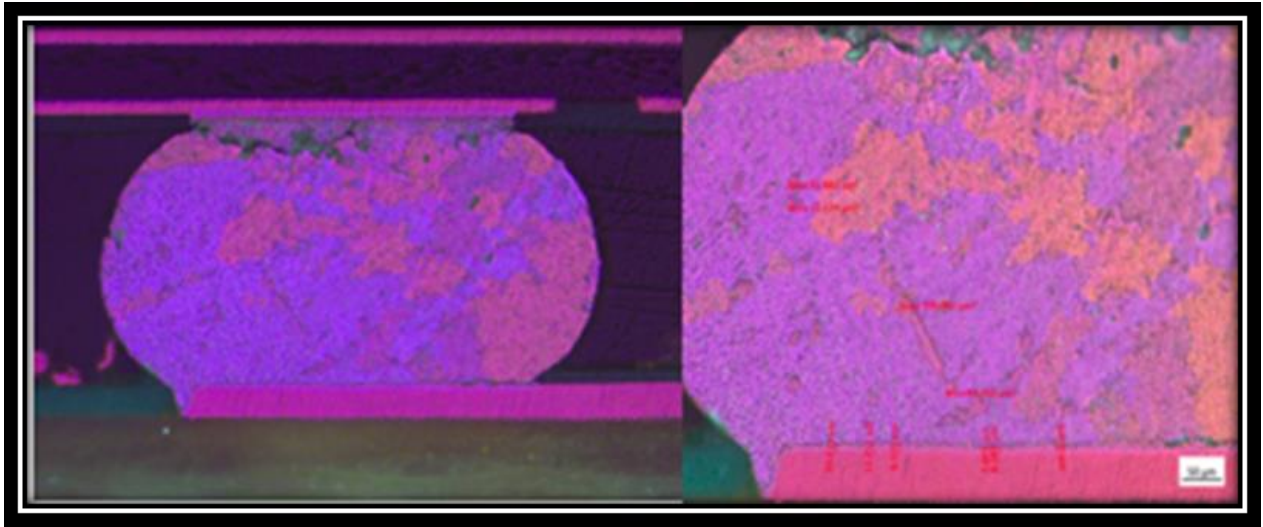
SBGA 600 Component with SAC305 Material with Heat Sink
